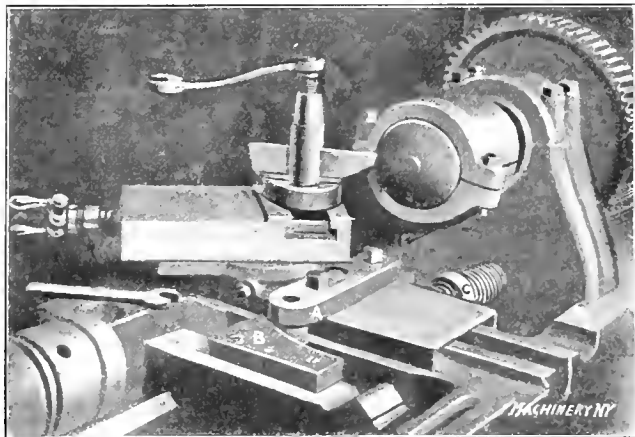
Lathe equipped with Forming Slide for Turning Spherical End of Piston
